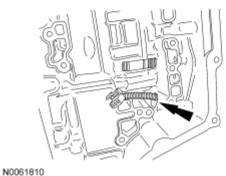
Identifying TSS Sensor & Bolt Courtesy of FORD MOTOR CO.
